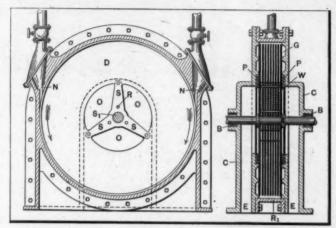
Cross-section of Tesla engine for reversible steam drive
